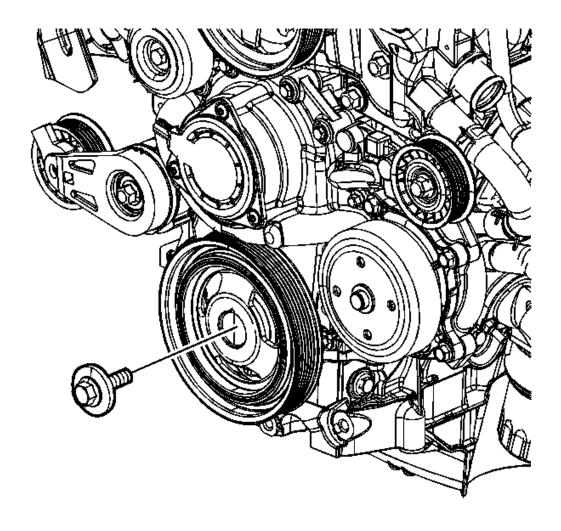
Identifying Crankshaft Balancer Bolt & Washer Courtesy of GENERAL MOTORS CORP.
